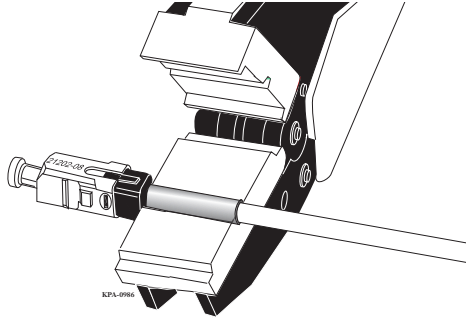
Use UniCam Crimp Tool to Crimp Ring onto Connector
